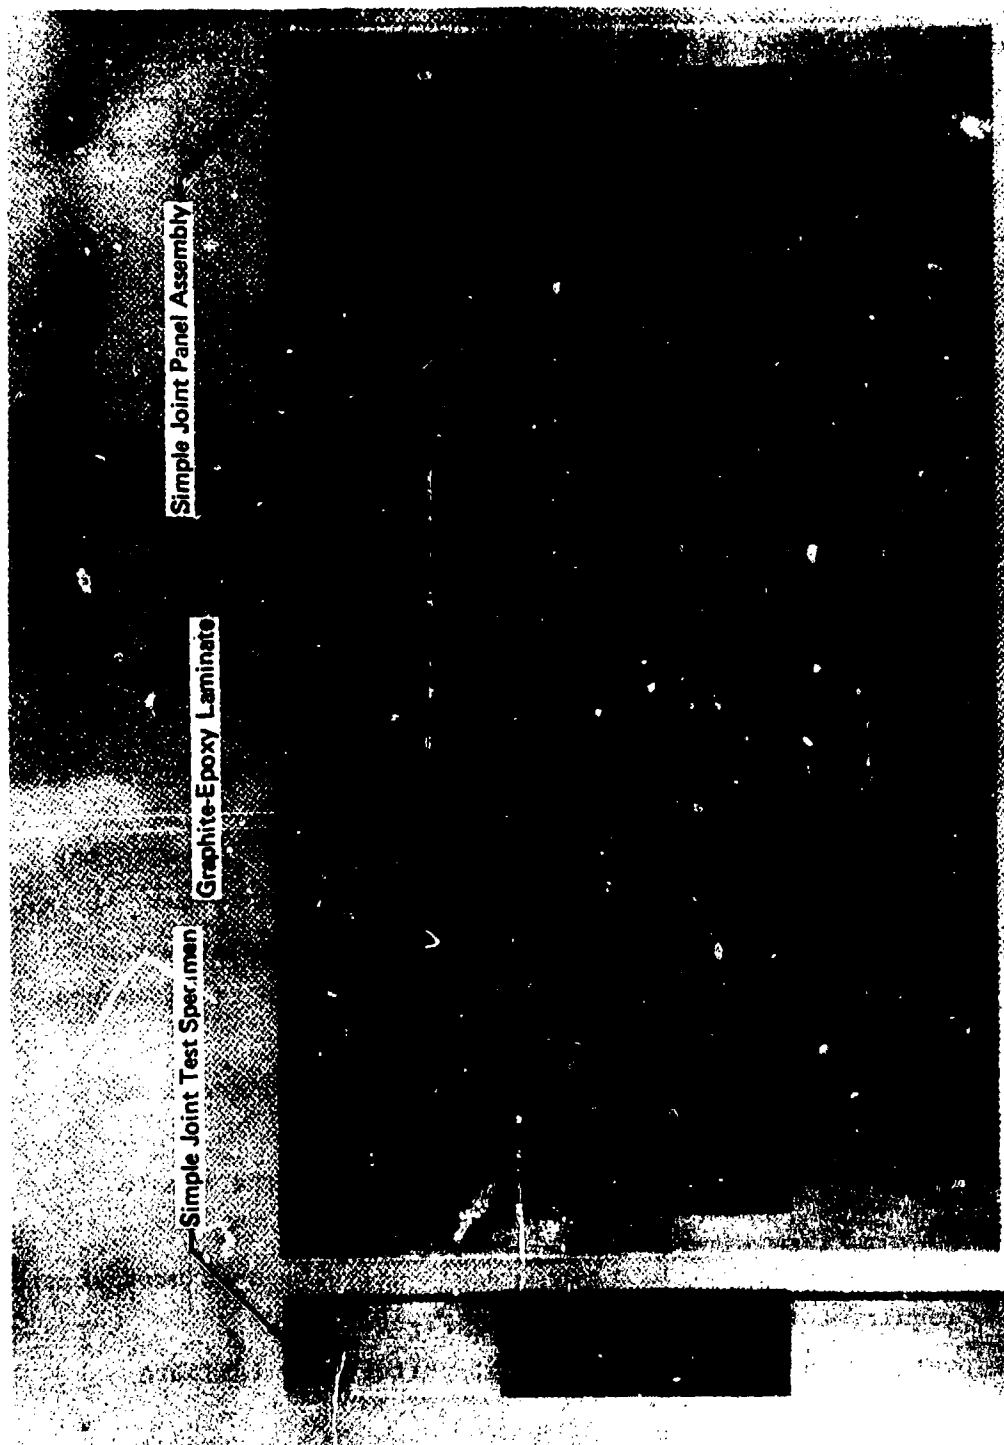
SIMPLE JOINT PANEL ASSEMBLY LAYOUT CONFIGURATION
